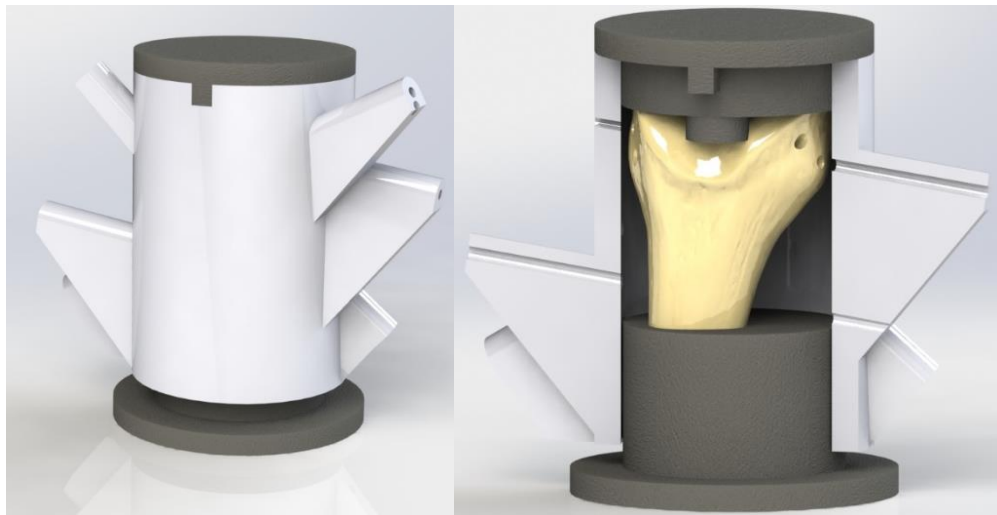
Rendering of SolidWorks (Dassault Systemes SolidWorks Corporation, Waltham, MA, USA) model of 3D-printed drilling fixture. The distal femur sample is compressed between two plungers (black) at a known location with the cylindrical body. A drill bit is then guided through the branches of the cylinder to precisely aim the drill holes.
